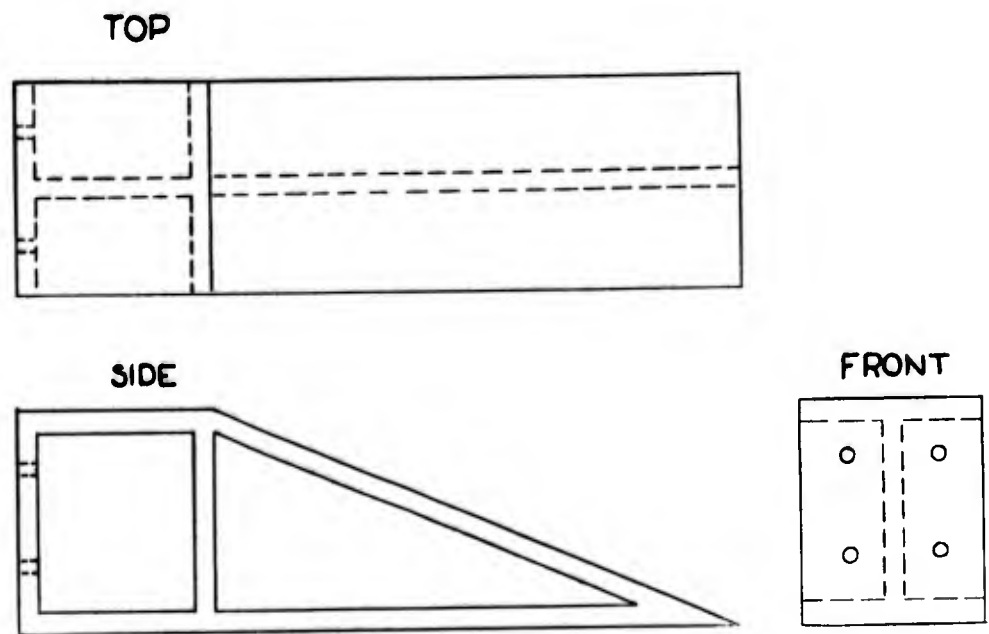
A. THREE-VIEW SKETCH OF TAPERED PLUG SUPPORT
